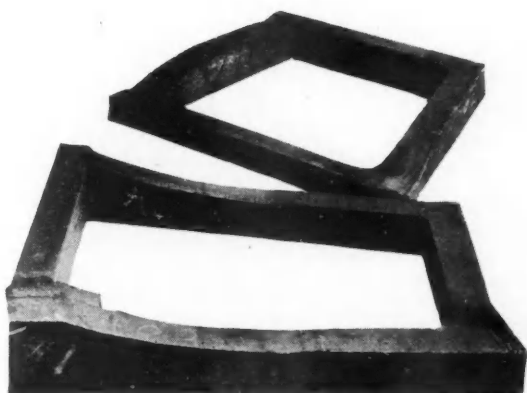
The flexibility of the cutting torch combined with welding is shown in this set of blank holders
